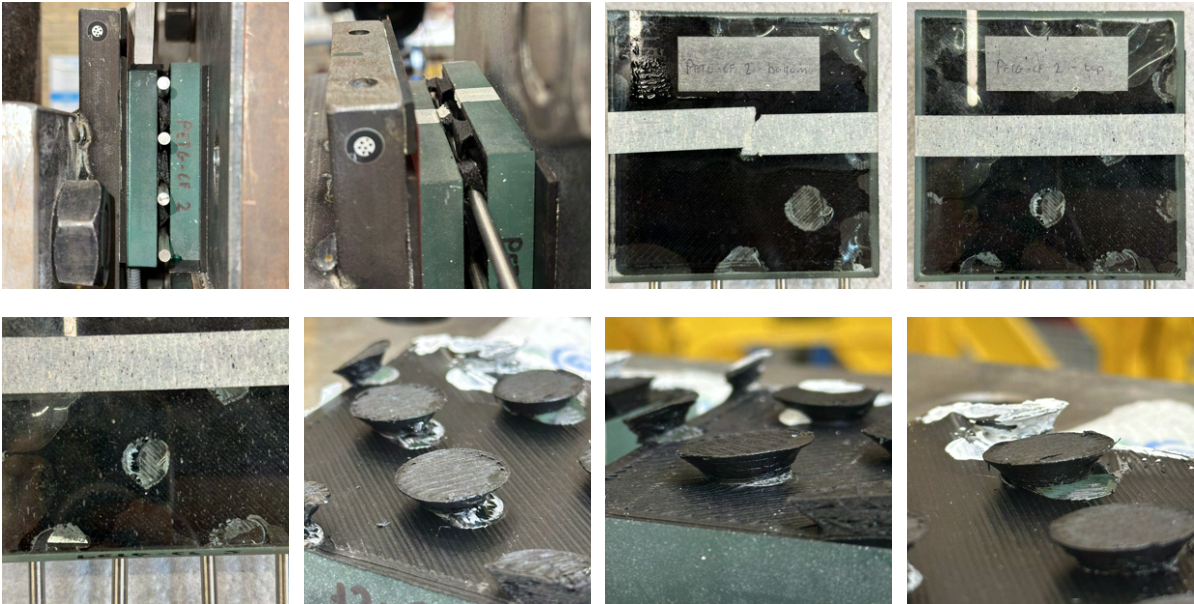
Specimen S2 — PETG-CF, Geometry 2 after testing
